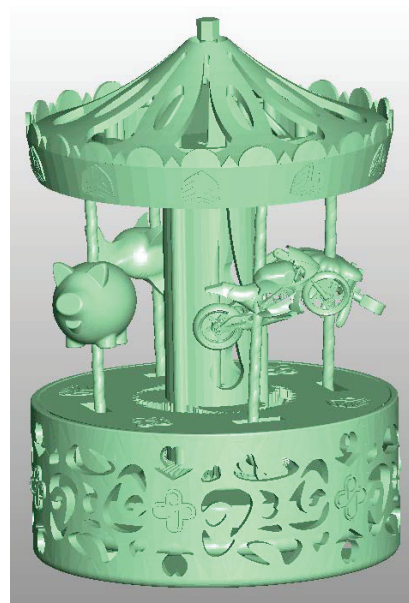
A rotational carousel with a flywheel at the bottom driven by a shaft located at the top. A planetary system steps up the energy input to the flywheel. A bevel gear system is attached to a support column and drives the reciprocating motion of the individual figures. The bevel system is mounted to an epicyclical gear set to reduce the rotational speed of the figures.[2]
